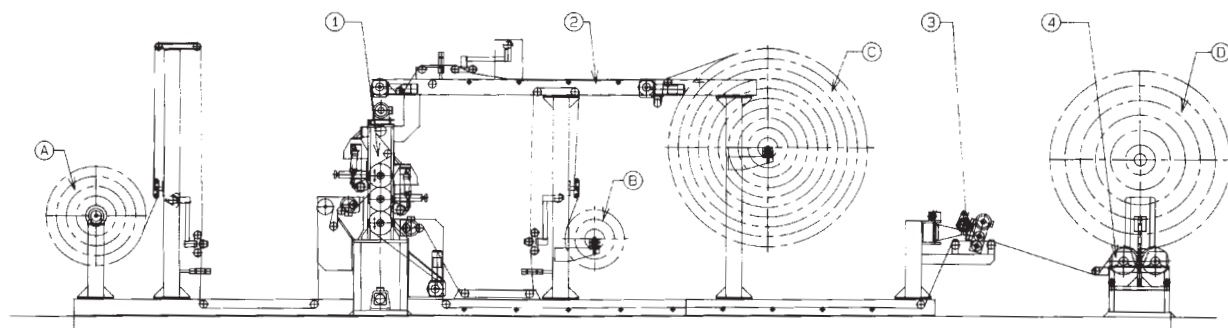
Standard machine for non-continuous operation, consisting of: A = unwinding unit textile; B = unwinding unit backlining; C = unwinding unit foam; D = winding unit finished product; 1 = laminating machine; 2 = frame for the material flow; 3 = edge trimming unit; 4 = mandrel winding unit.
